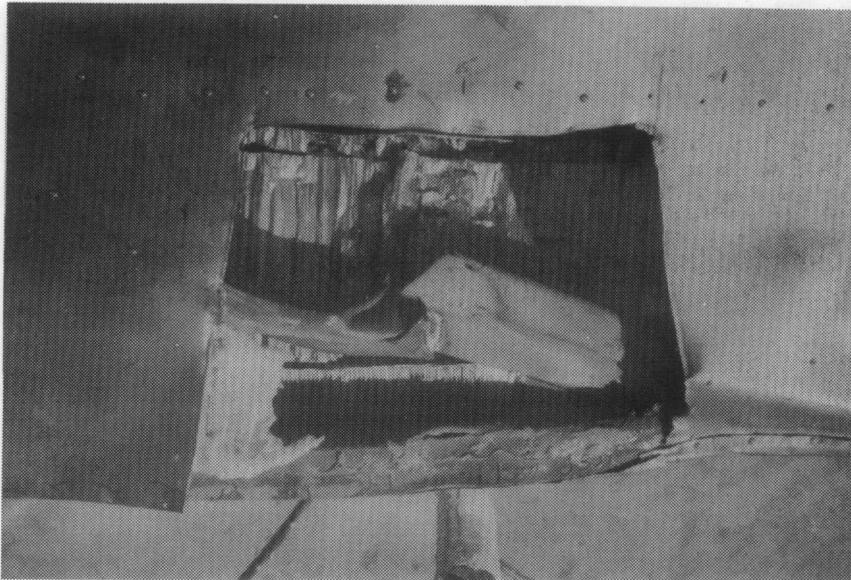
Inner Surface of Outer Door - Bolt Holes
